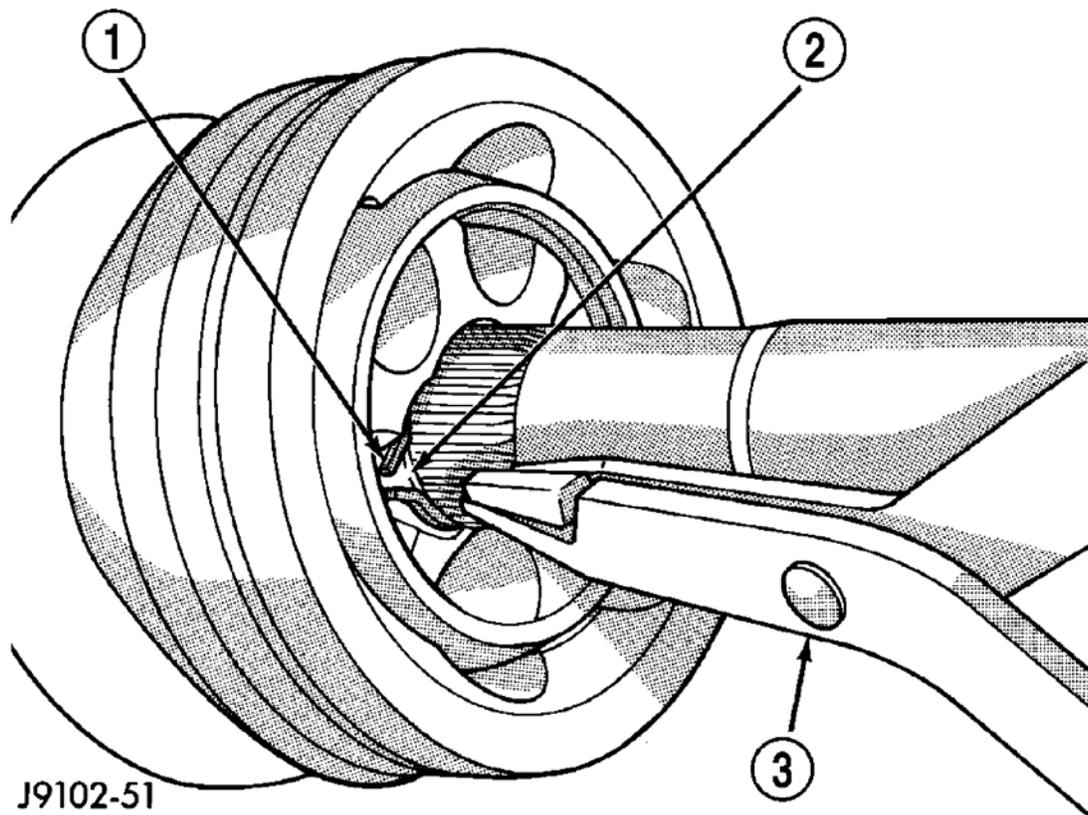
Spreading Snap Ring And Slide Joint Off Shaft
